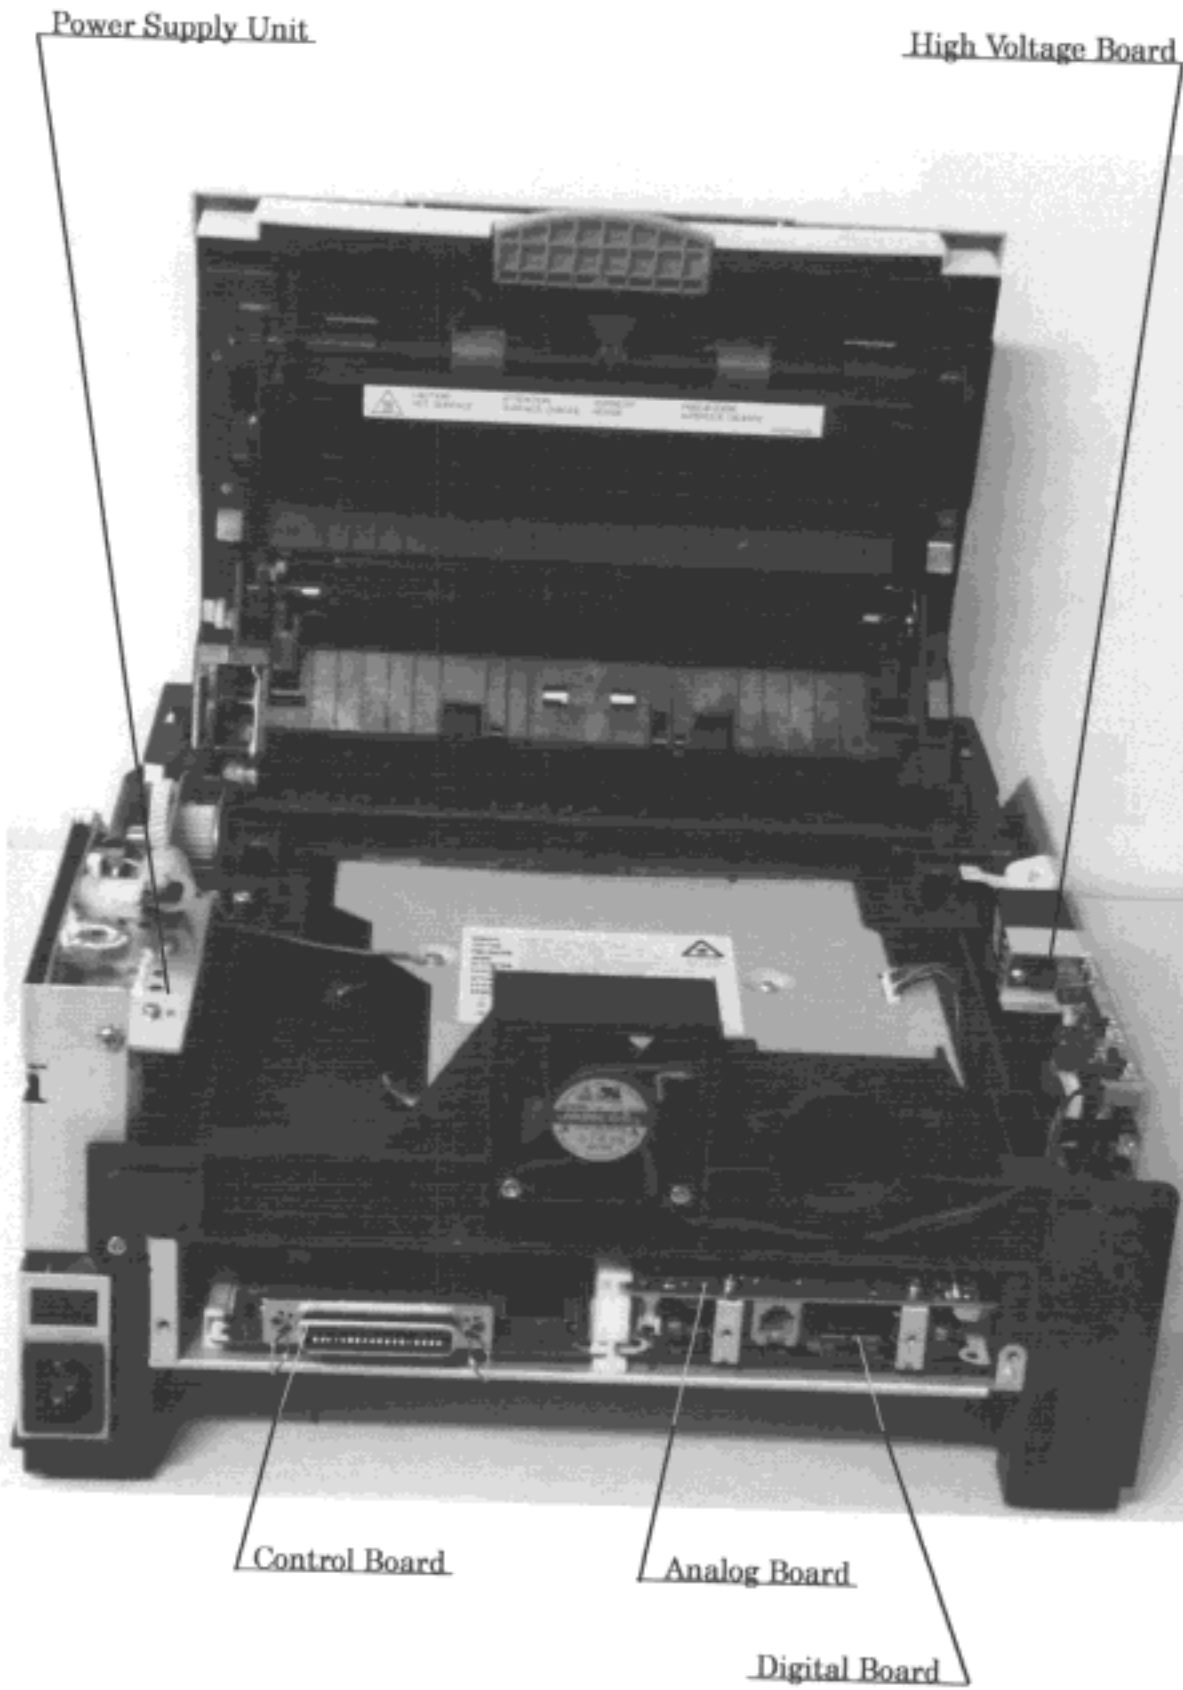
INTERNAL VIEW REMOVING BOTTOM COVER
